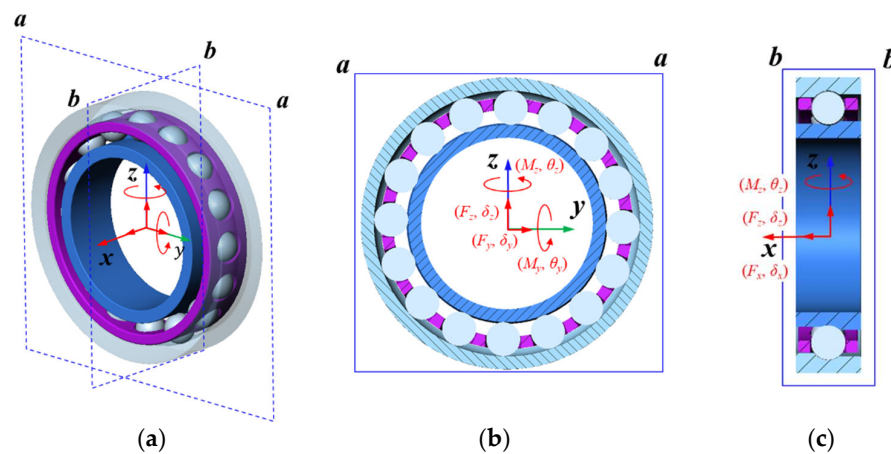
Internal structure of angular contact ball bearing. (a) Overall structure; (b) Radial sectional view; (c) Axial sectional view.
